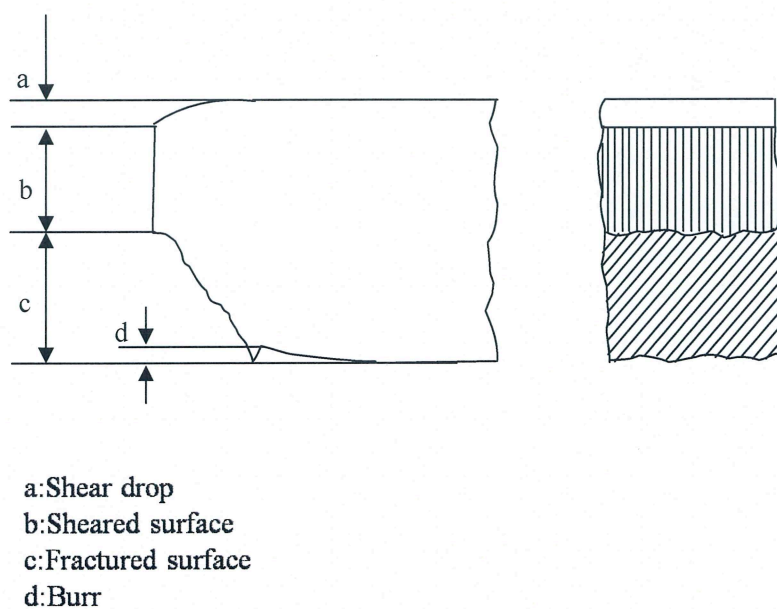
Schematic side view of punched sheet steel and definitions of shear drop, sheared surface, fractured surface and burr
